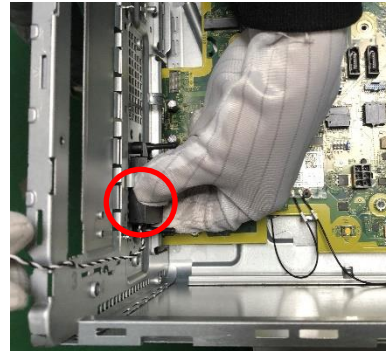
Remove the SSD from motherboard. SSD PCB>10 sq cm
